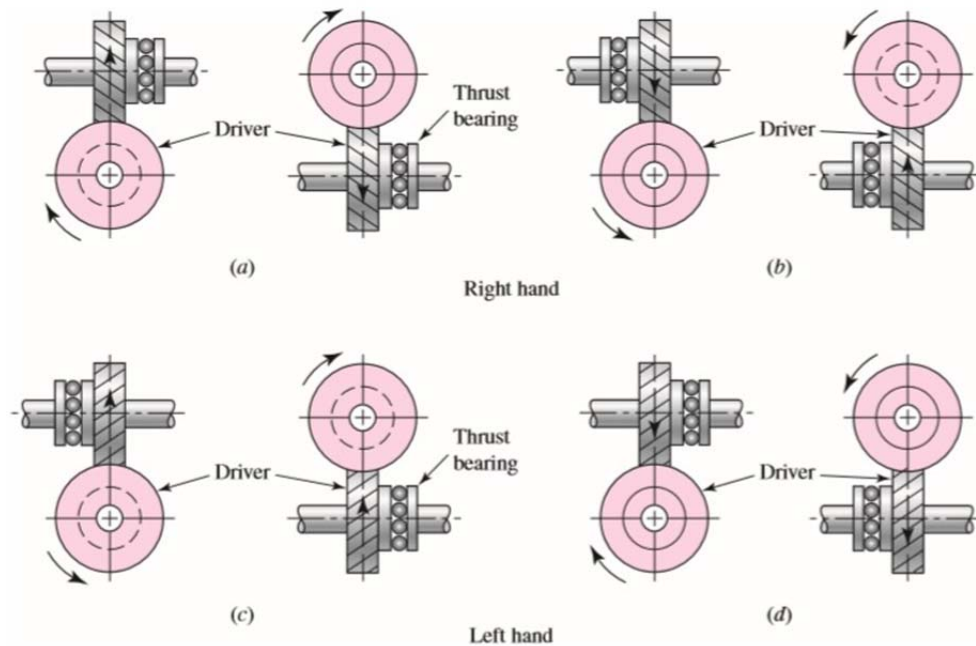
Thrust, hand relations, and rotation relations for worm gears or crossed helical gears
